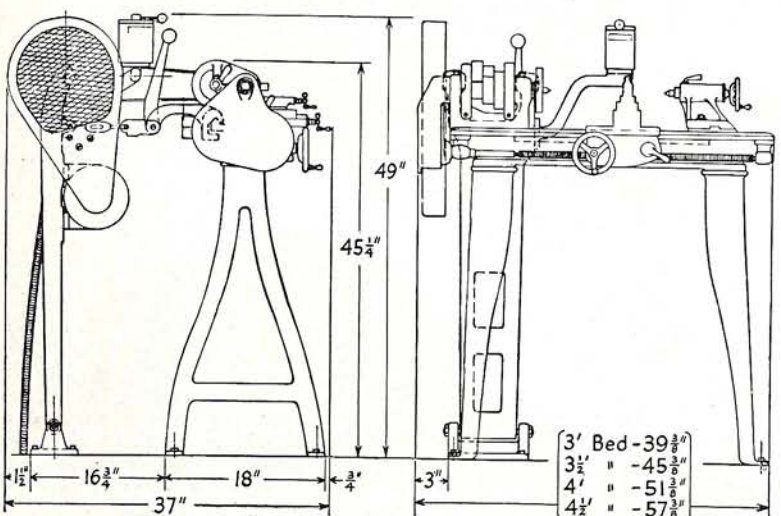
Floor Space Required for 9-inch "Workshop" Floor Leg Lathes.
